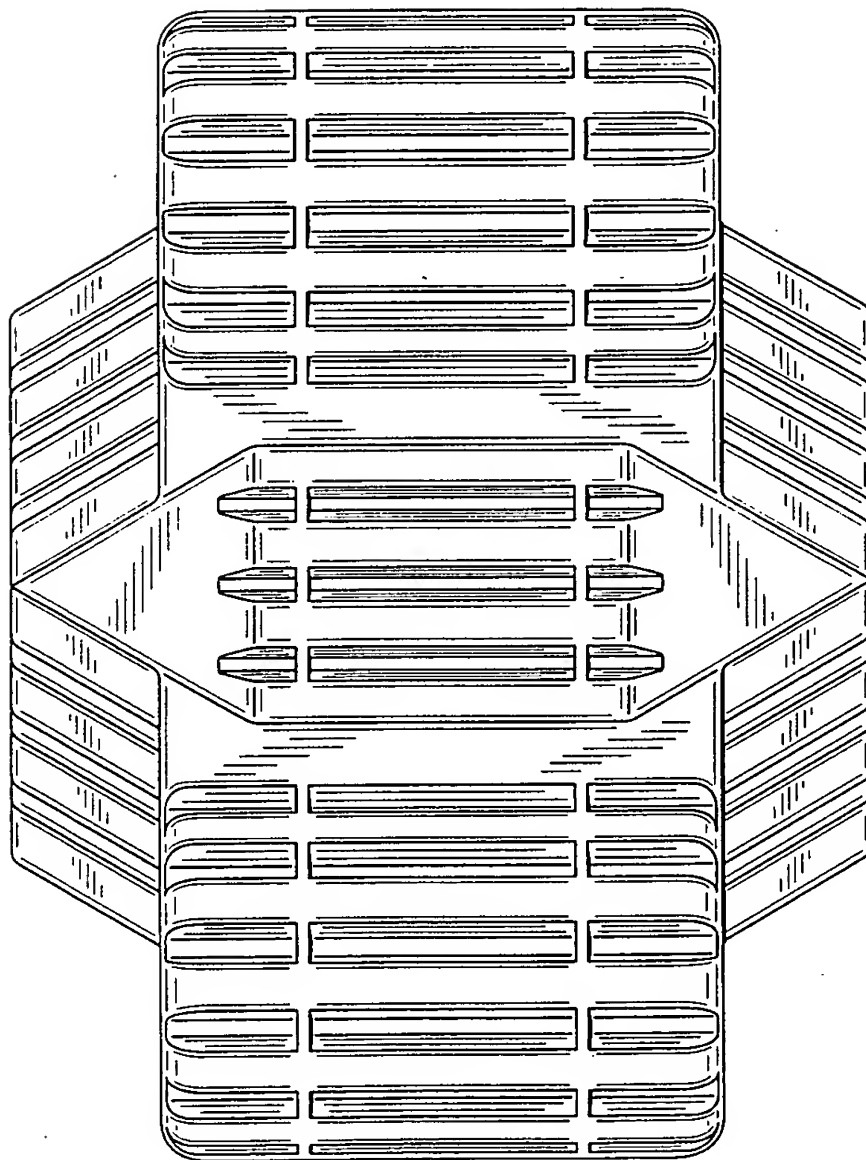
⁷ is a perspective view of the container assembly of FIG. 1, showing the top hexagonal flange, the central hexagonal body, and the bottom hexagonal flange. The central body has a hexagonal opening in its center, revealing a grid of horizontal slots. The top and bottom flanges also feature a grid of horizontal slots. The entire assembly is shown in a perspective view, highlighting its three-dimensional structure.
